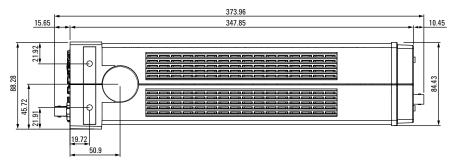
Dimensions (side view, without handle and bumper, in millimeters, nominal)
